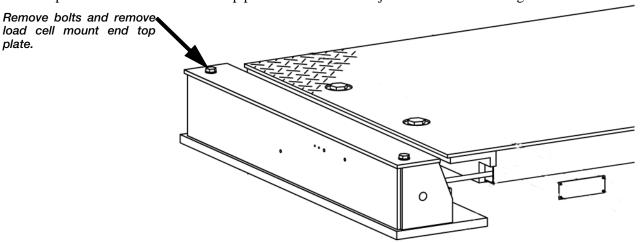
Remove Bolts That Hold The Box End Plate Down
